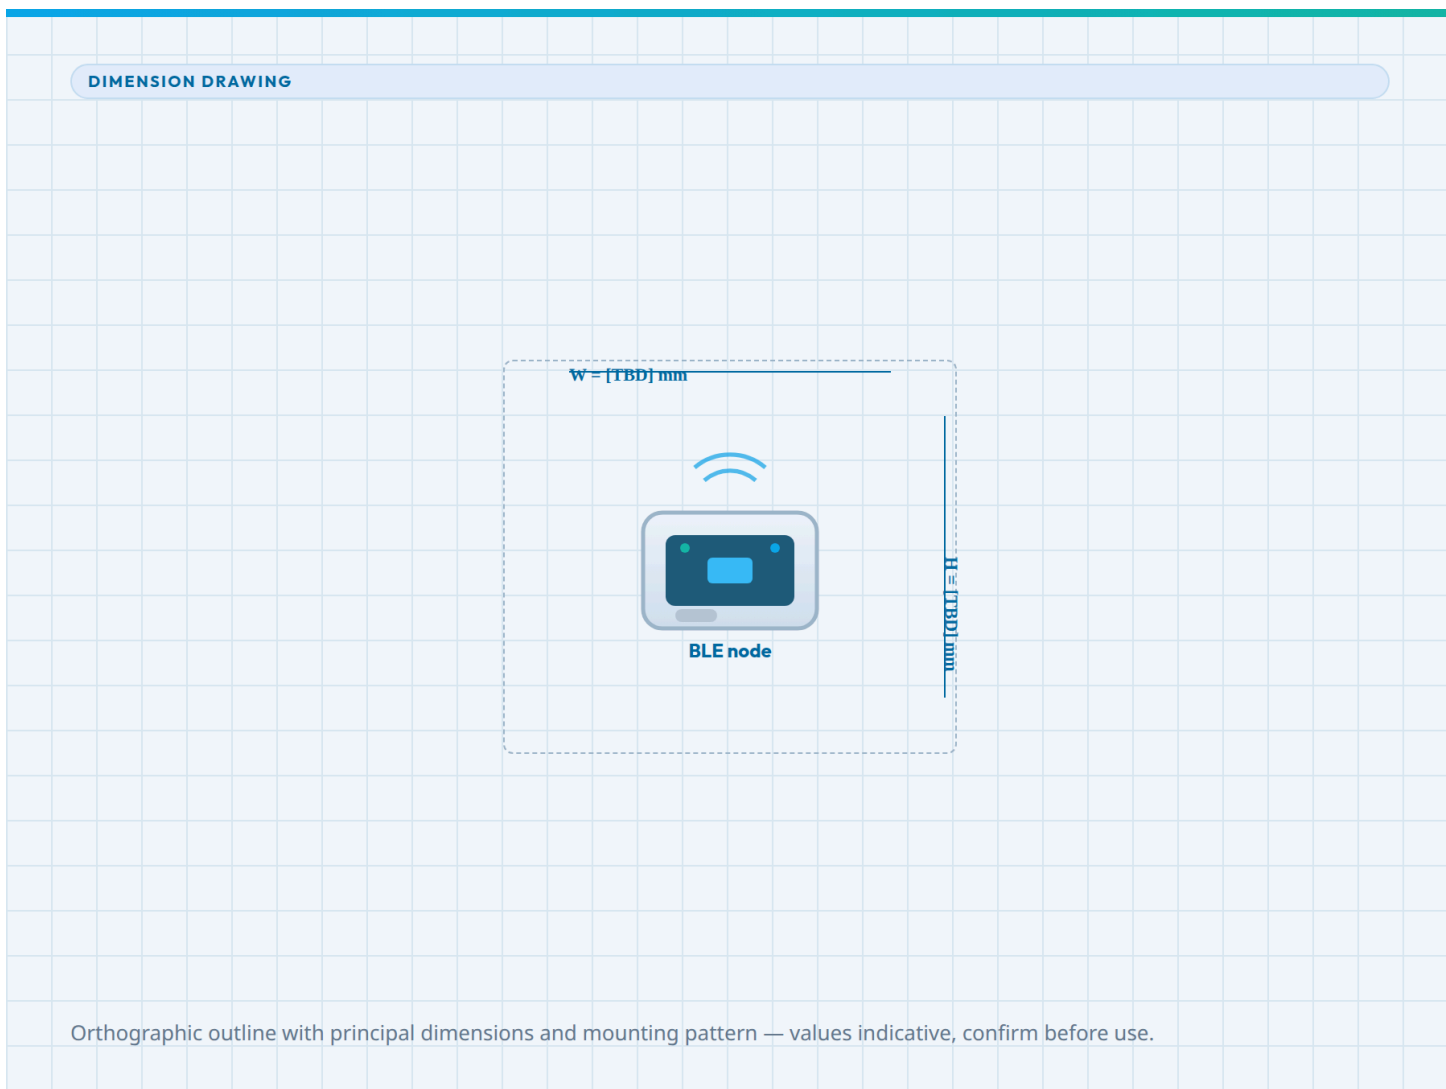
Overall dimensions and mounting provisions (mm). Values ≠ proposed.
